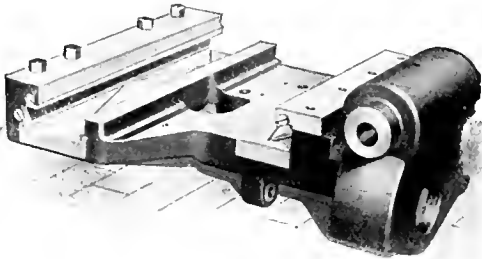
Cutter Slide Reversed, to show Gibs and Bearing Surfaces
